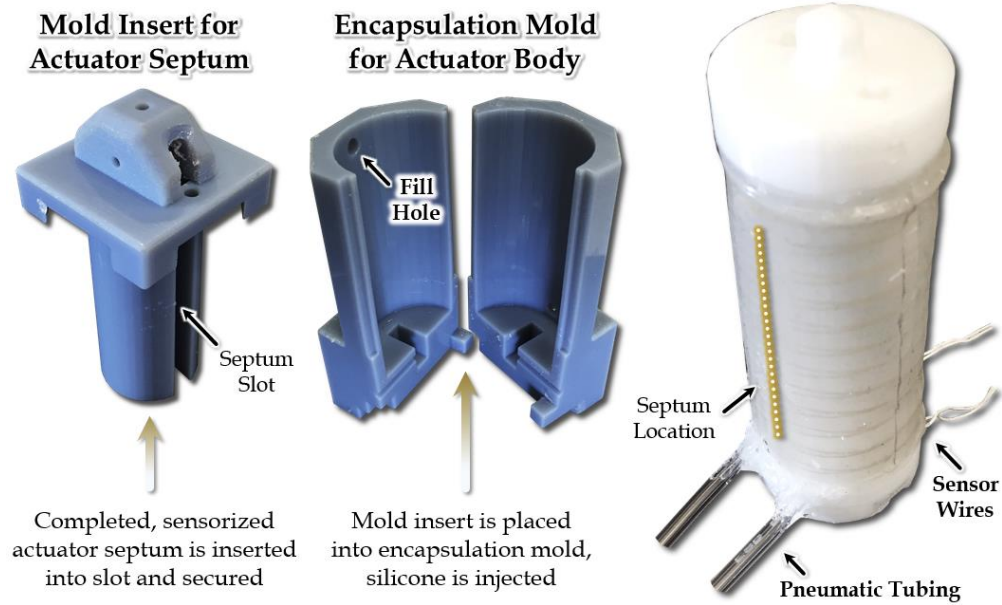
Photos of the pneumatic bending actuator assembly process, with the completed bending actuator shown on the far right
